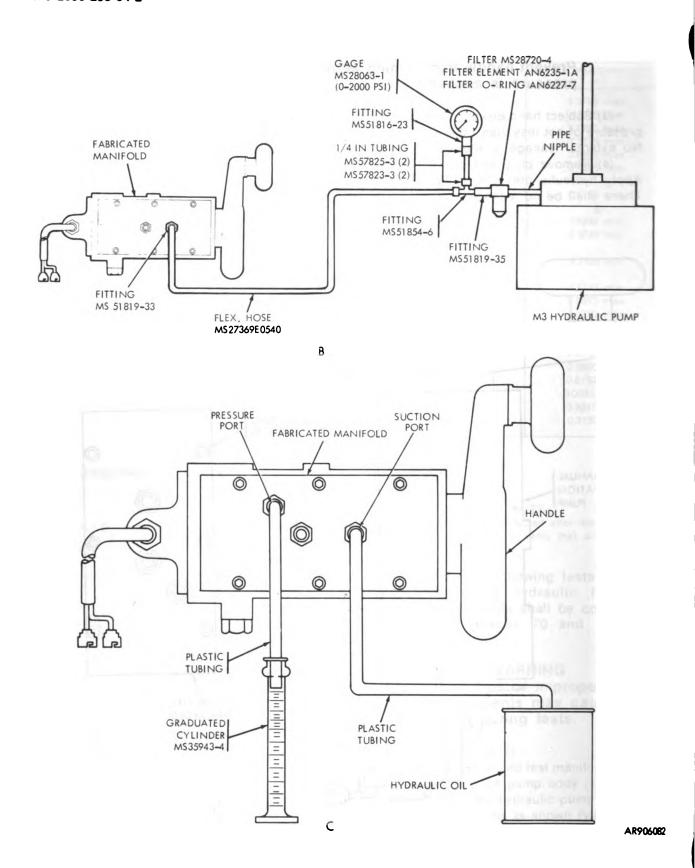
Manual elevation pump body test setup (2 of 2).
